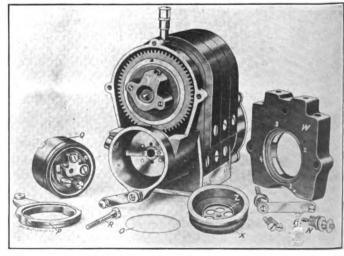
Distributor End of U & H Magneto with Distributor Housing Removed to Illustrate Method of Assembly.
